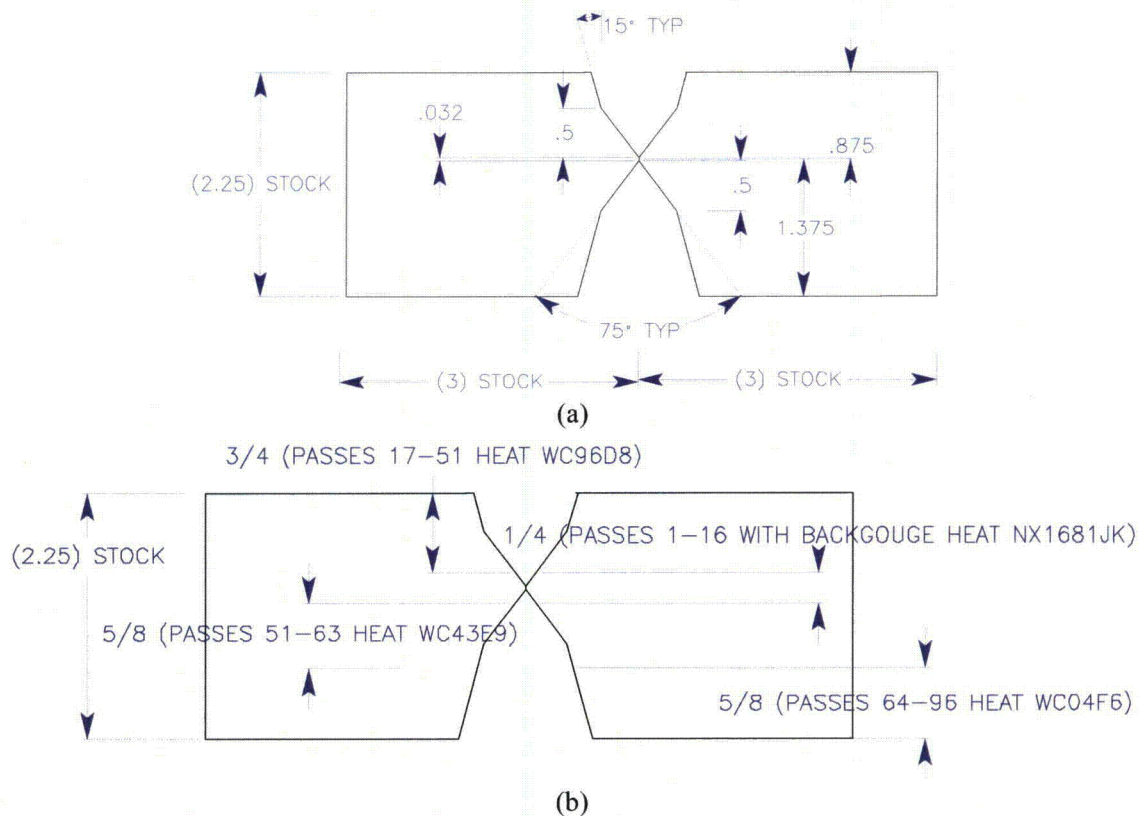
Schematic of the weld joint design for the (a) Alloy 152 double-J weld and (b) weld passes and filler heats used. Dimensions are in inch.
